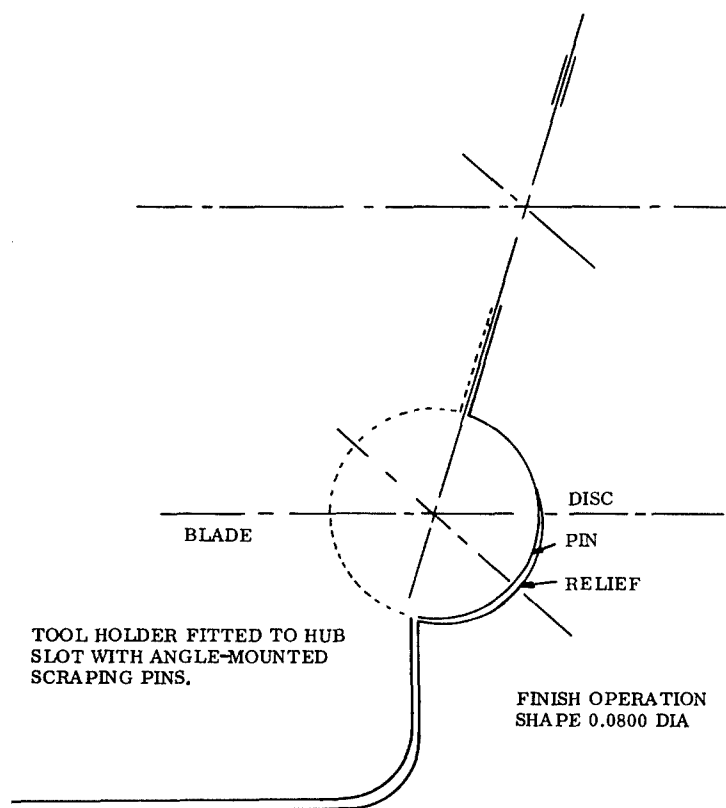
Turbine Disc and Blade Pin Attachment - Finish Machining.
